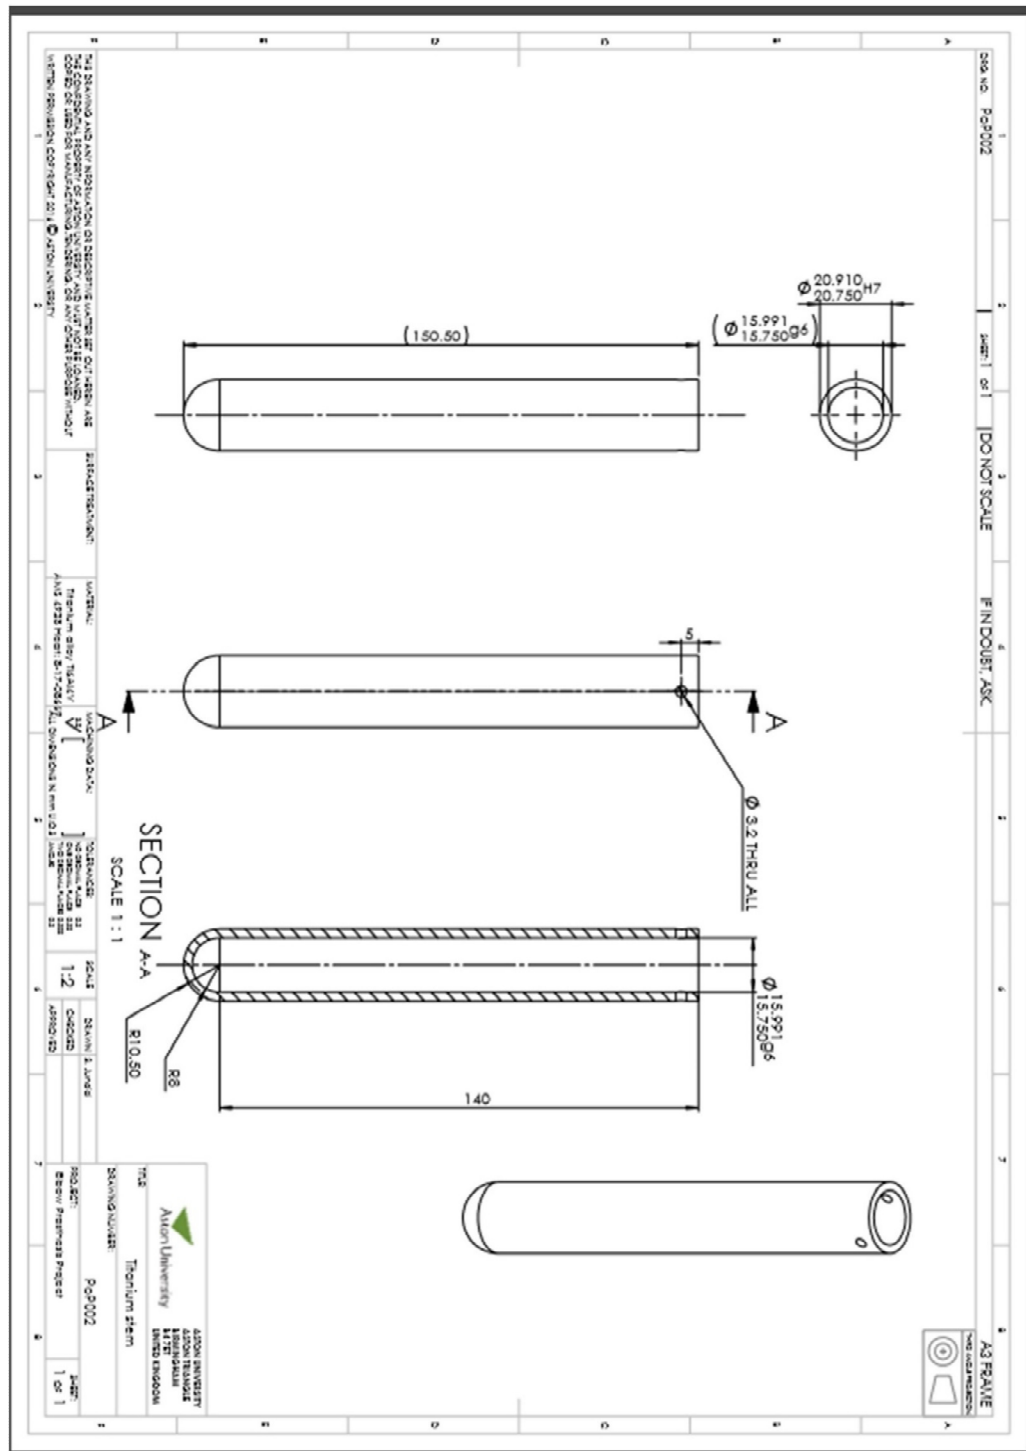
Technical Drawing for the Outer shell of Humeral Stem.
